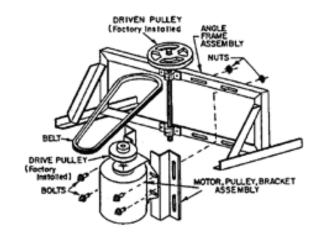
MOTOR INSTALLATION, TYPE 3
